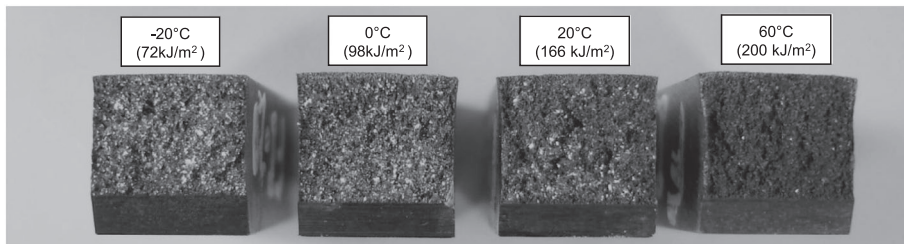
Macroscopic fracture surface of the specimens broken under impact loads.
